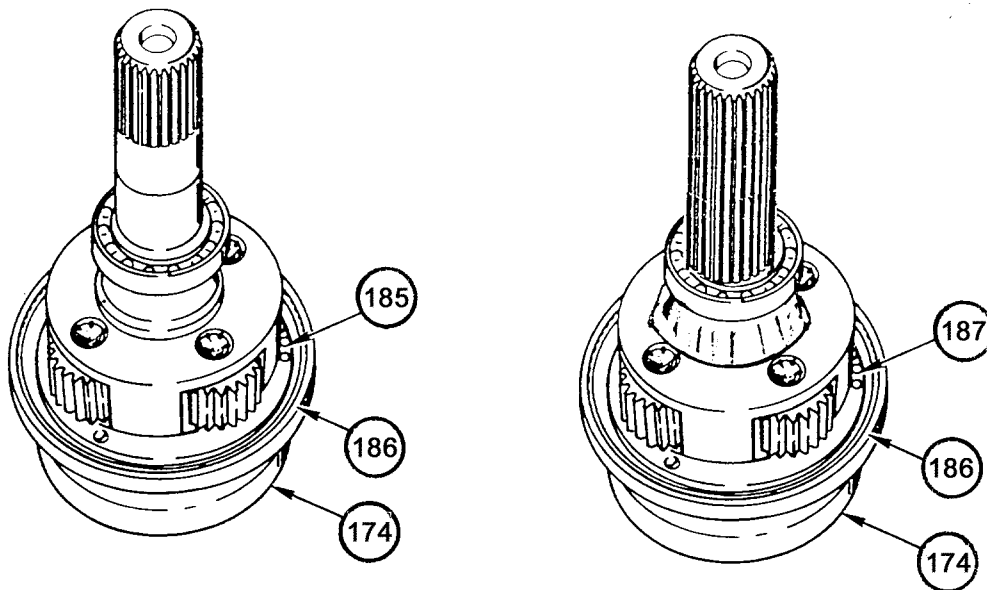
Rear (P3) Carrier Assemblies. (Repeated)
